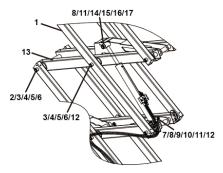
Assembling the fourth fork and upper cylinder(SR4069D)
